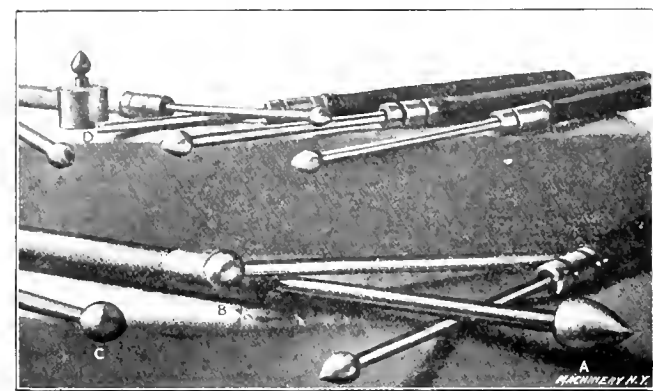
Metal Spinning Tools with High-speed Steel Removable Heads
